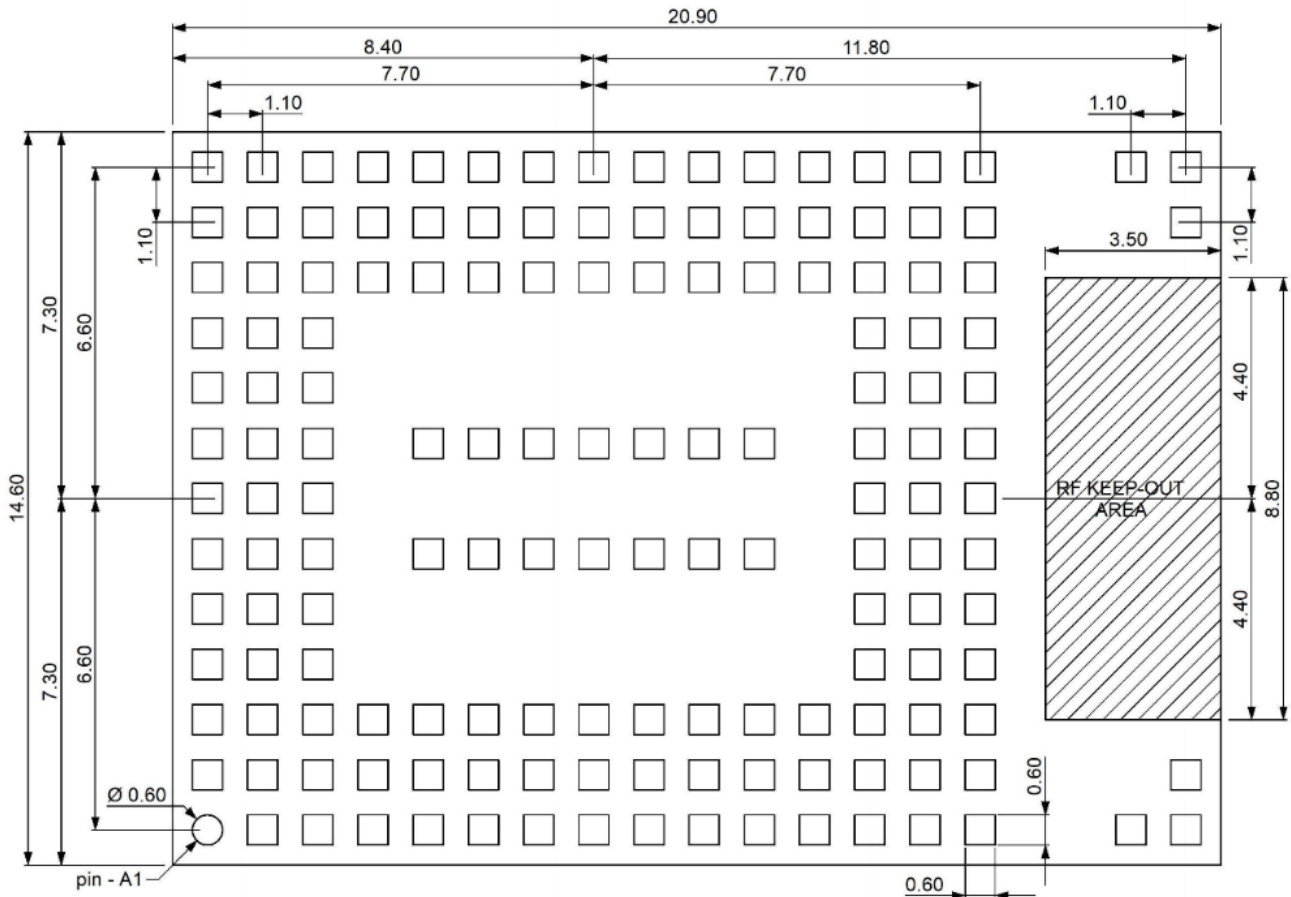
IRIS-W106 recommended PCB footprint (top view)
